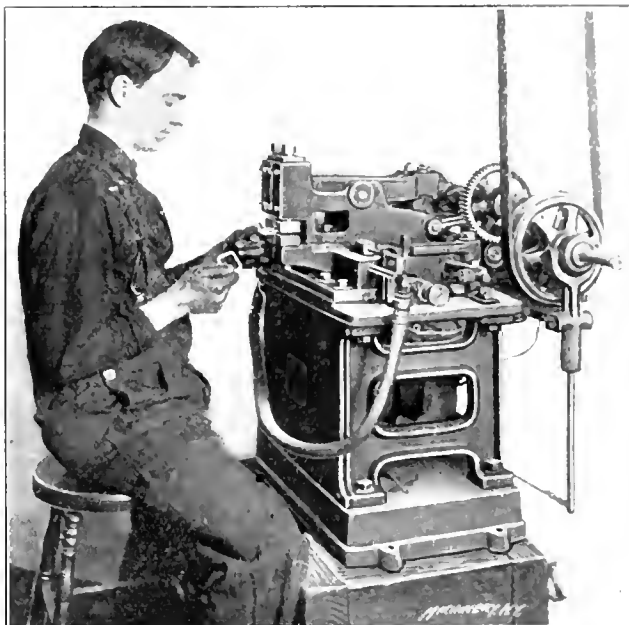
A Small Automatic Machine for Welding Belt and Harness Buckles, etc.
